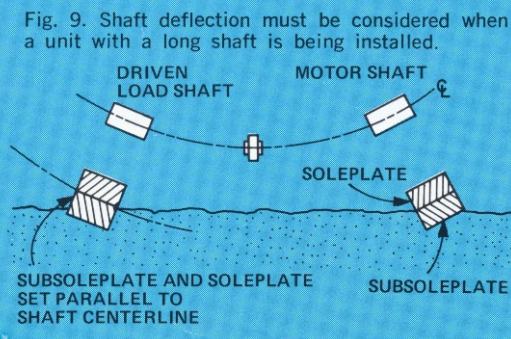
Shaft deflection must be considered when a unit with a long shaft is being installed.
